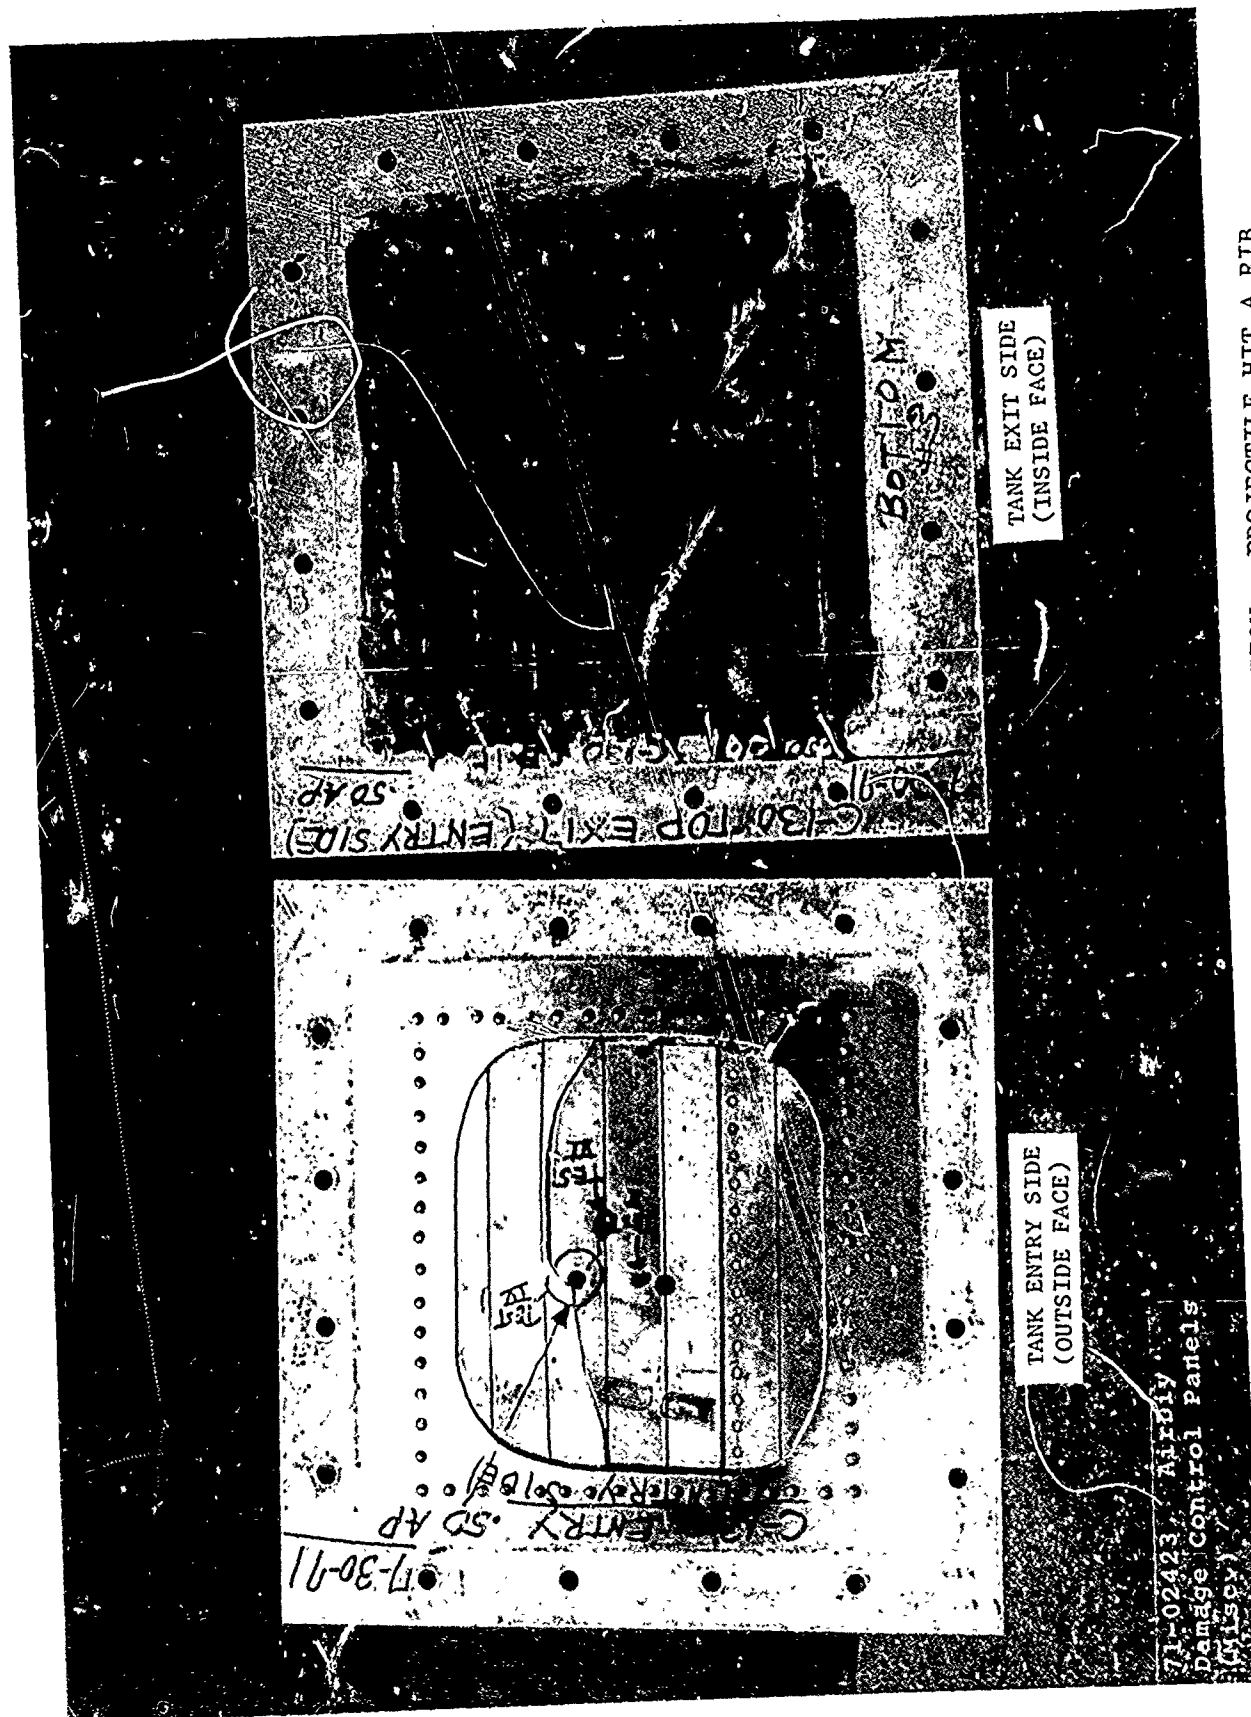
C-130 PANEL WITH DAMAGE CONTROL PROTECTION - PROJECTILE HIT A RIB
